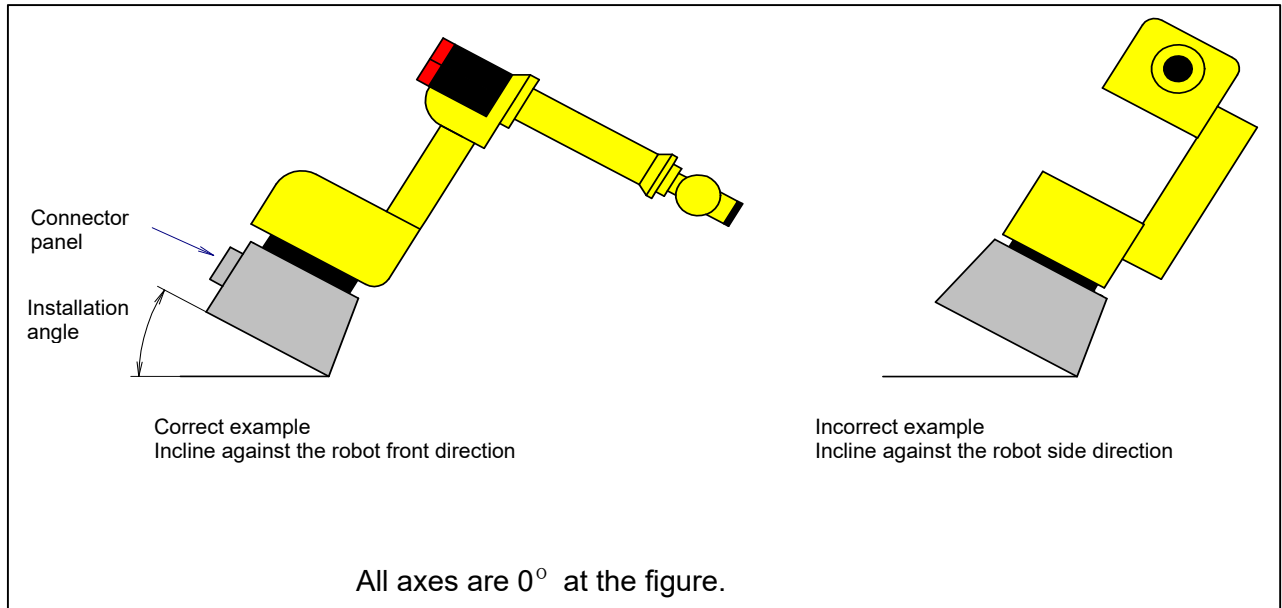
(a) Direction of robot wall mount and inclination installation
